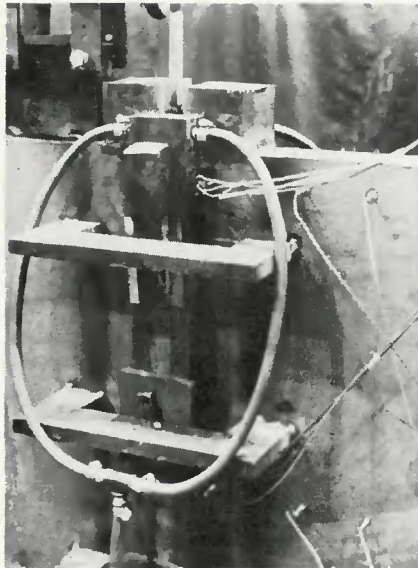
Completed 4 in. (102 mm) thick electroslag weldment with thermocouples attached
